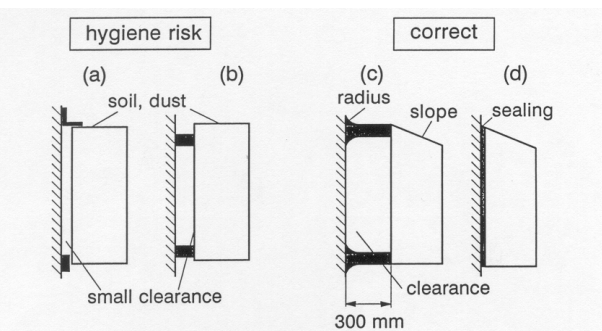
Installation of equipment on walls. Equipment should either be sealed to walls, or sufficient clearance should be provided for cleaning.
